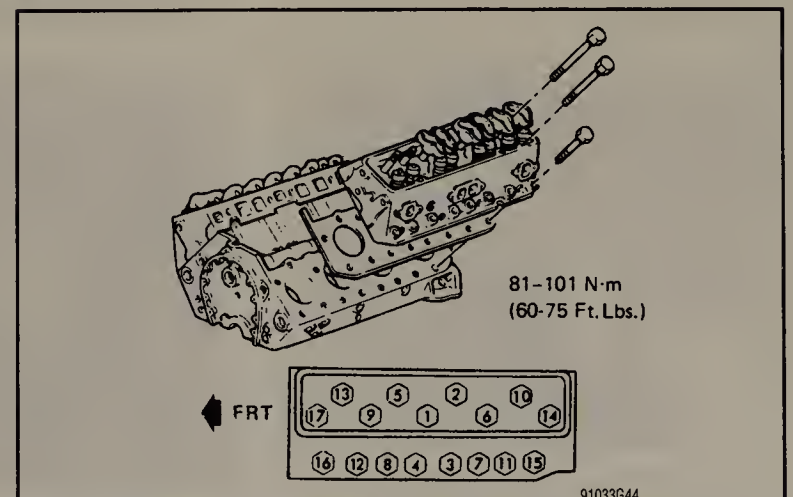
Cylinder head mounting and bolt tightening sequence—5.7L (VIN 8) engine
